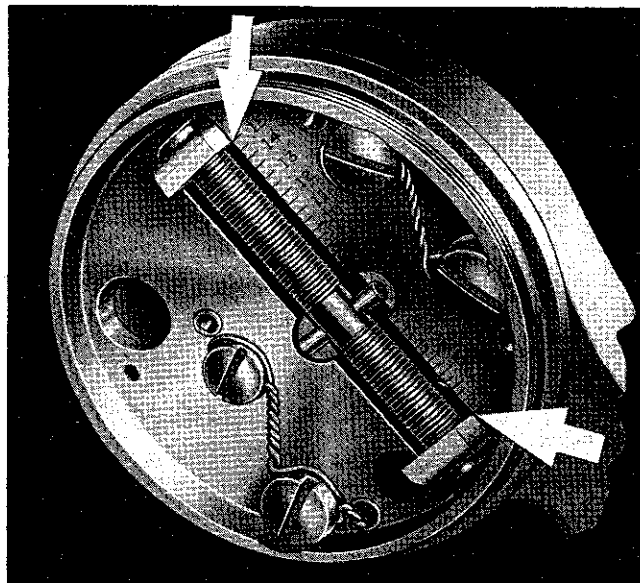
Check Setting of Counterweight Adjusting Screw Nuts
